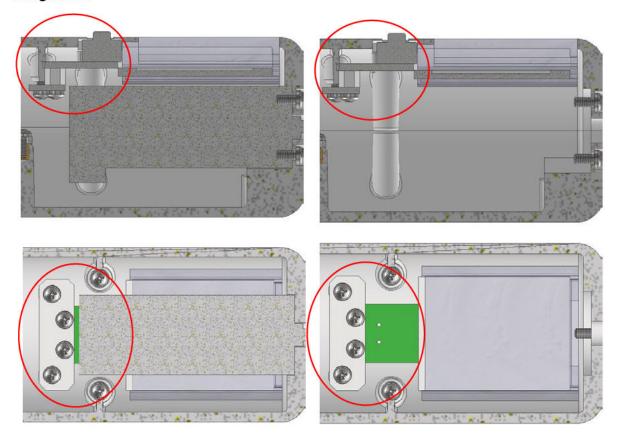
Pushbutton assembly in handle option A from two cross-sectional views with motor (left column) and motor removed (right column)
